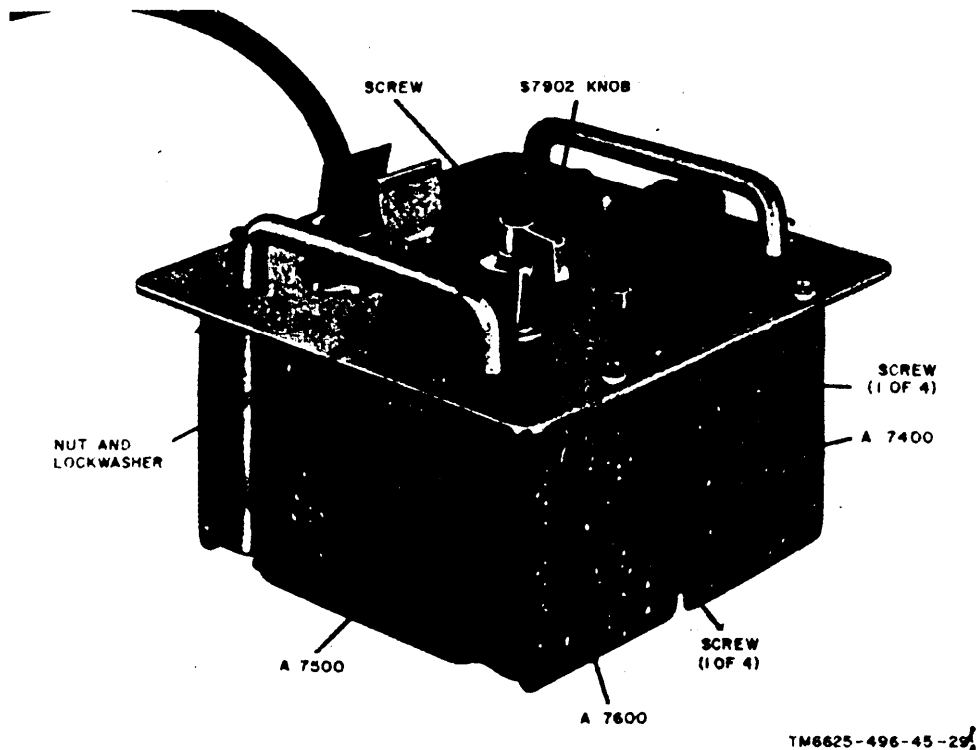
Test Set, Radio TS-1777/VRM-1, lower left oblique view.
